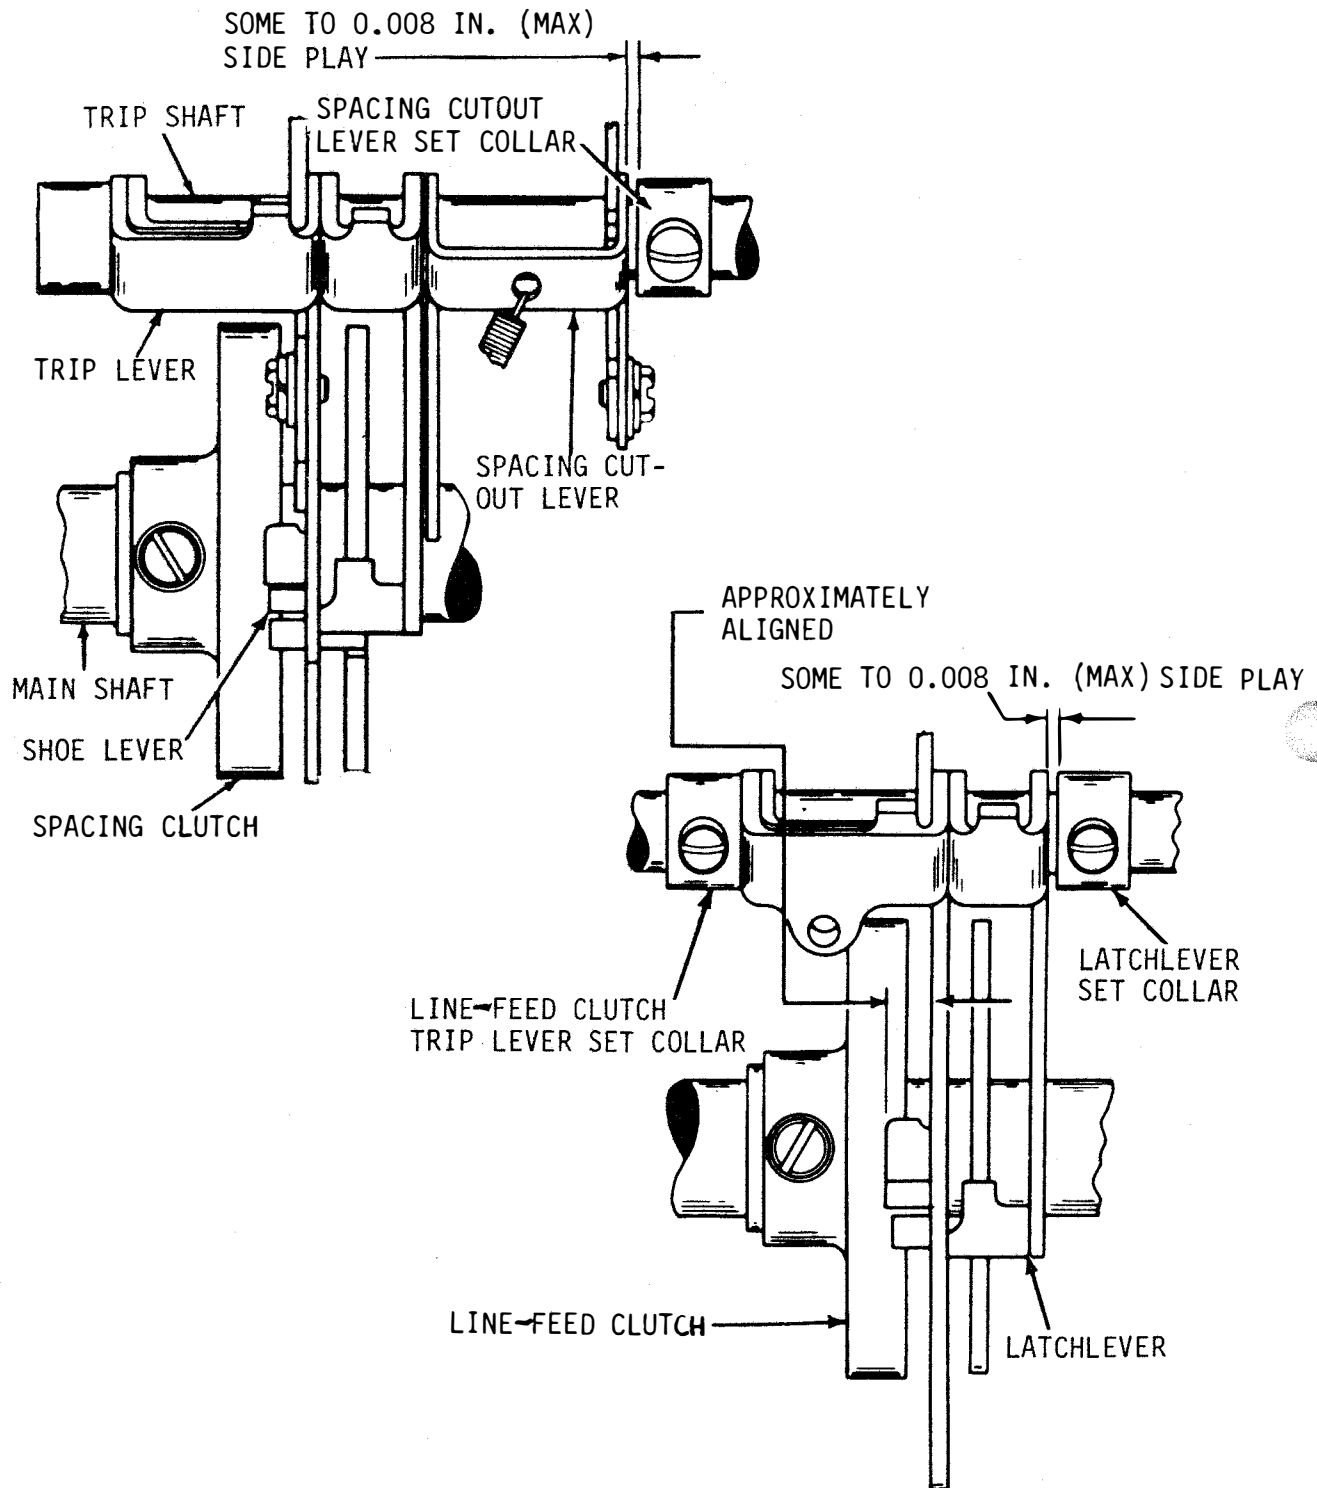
Clutch Trip Shaft Set Collars, Rear View
